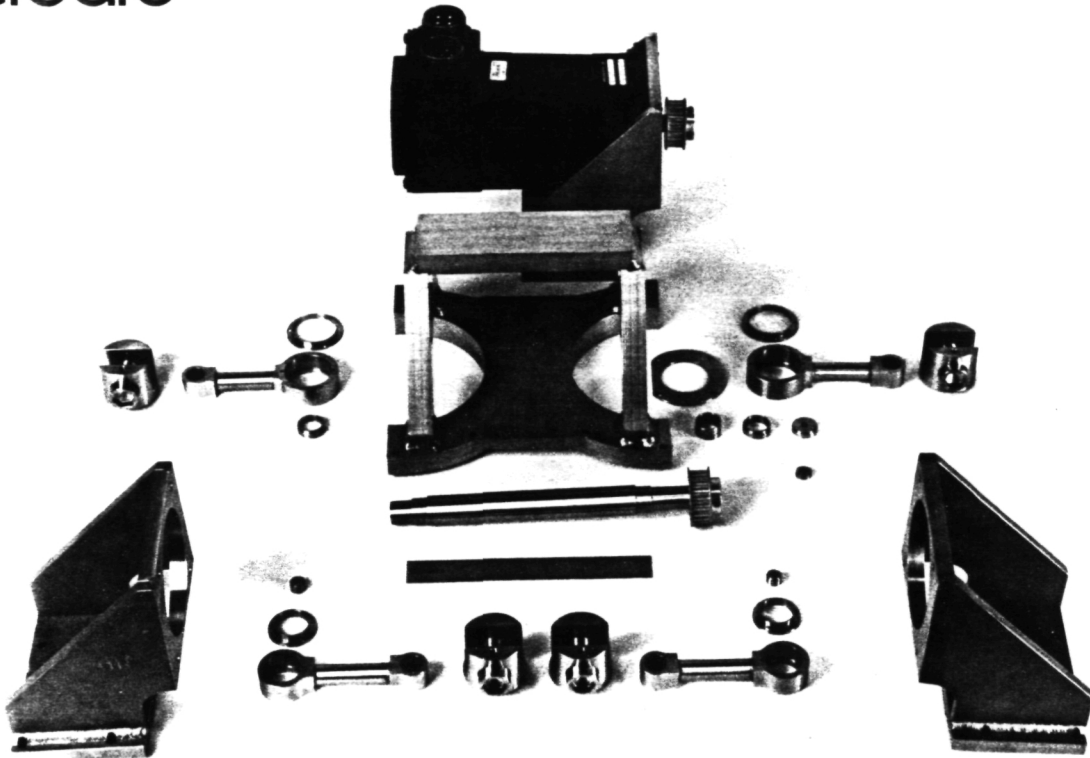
CRYOCOOLER DRIVE SYSTEM COMPONENTS
